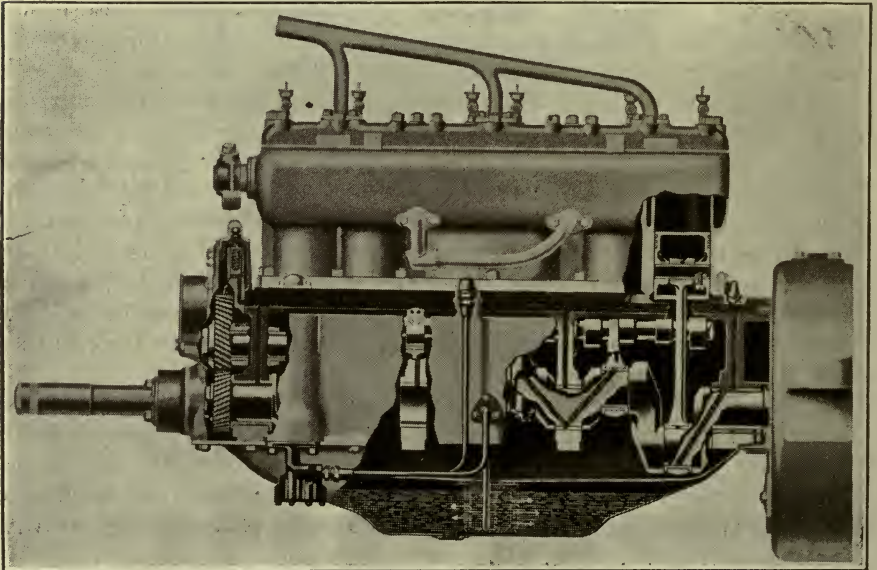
Continental Red Seal 7R. Full Pressure Lubricating System.
